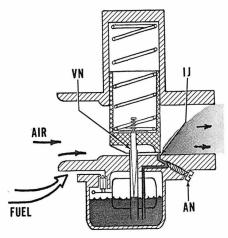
With throttle slide lowered to idle speed position, only a small amount of air is allowed to pass. The valve needle (VN) is lowered, closing the main jet and fuel is drawn from the idle jet (IJ). Idle mixture adjustment needle (AN) controls fuel-air ratio.
